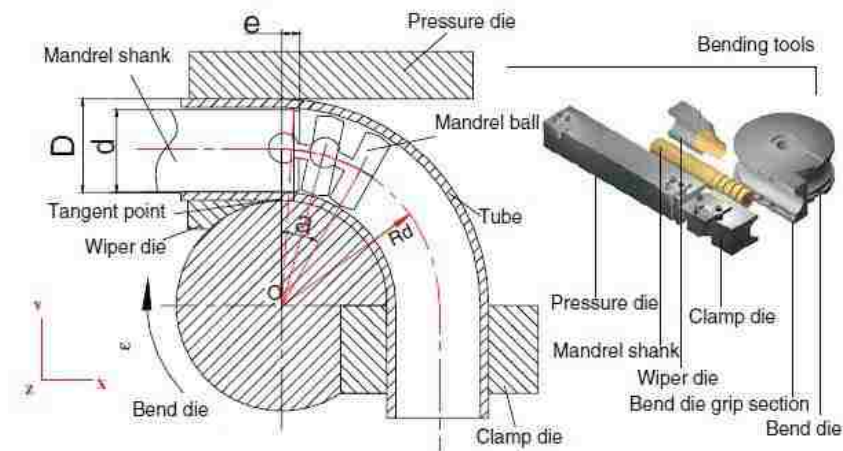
Schematic of a rotary draw mandrel bender [53]
